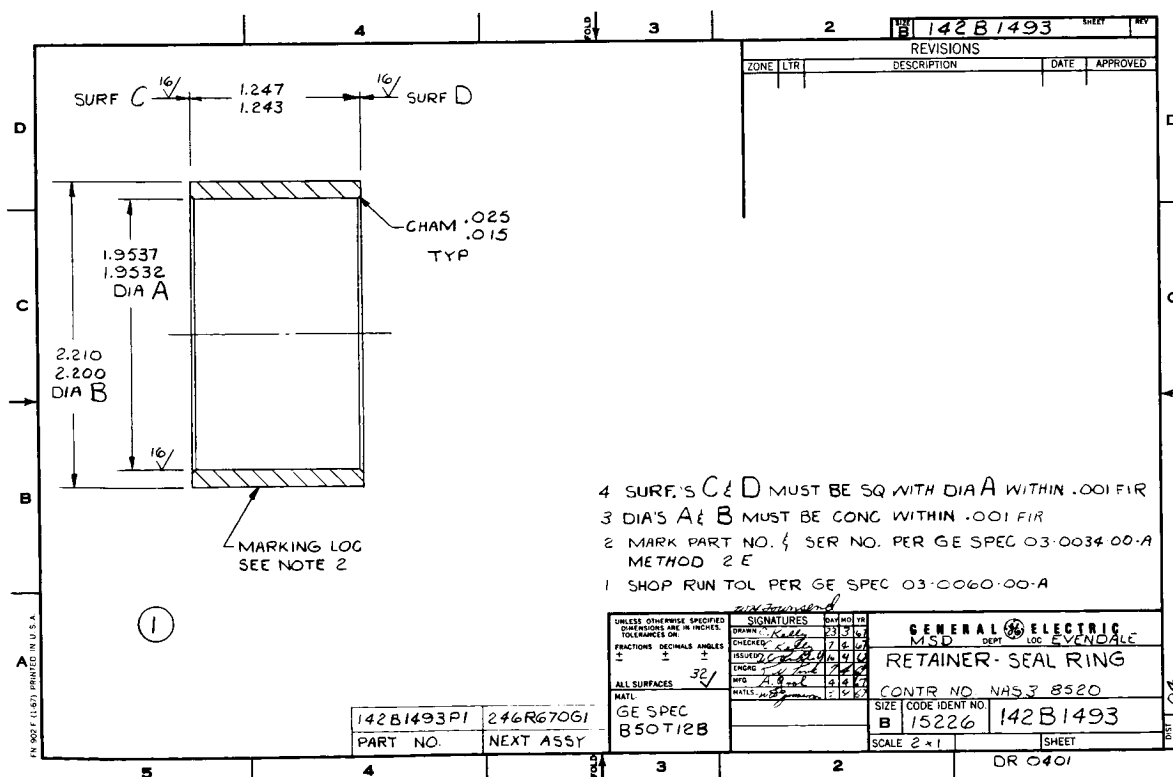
Retainer for Tie Bolt-to-Shaft Seal. (142B1493)
